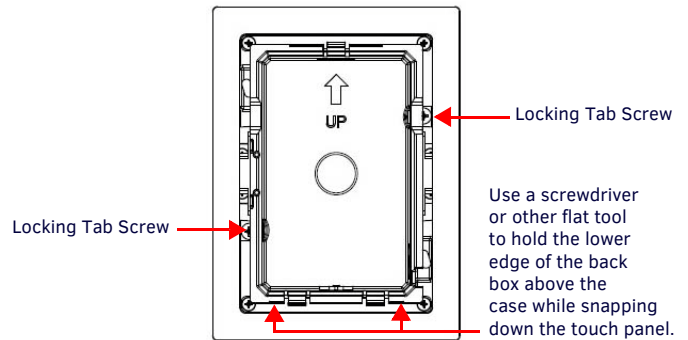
LOCKING TAB LOCATION ON THE MXA-FMK-43
